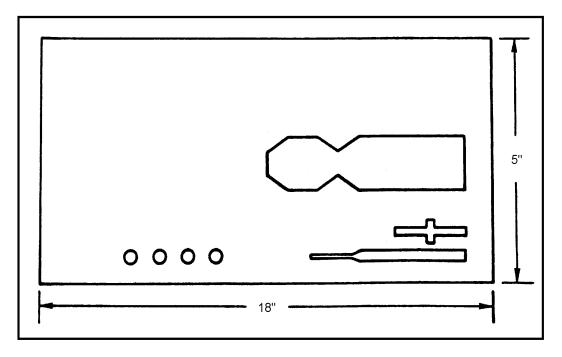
Insert for Drawer (Oxygen Mask Tools)
